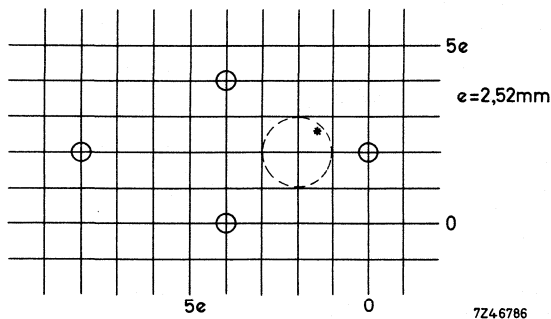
Hole pattern for mounting on a printed-wiring board;  $e = 2,54$  mm.
